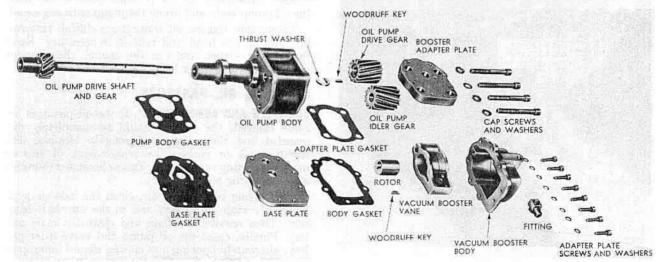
PARTS OF THE COMMANDER OIL PUMP AND VACUUM BOOSTER
